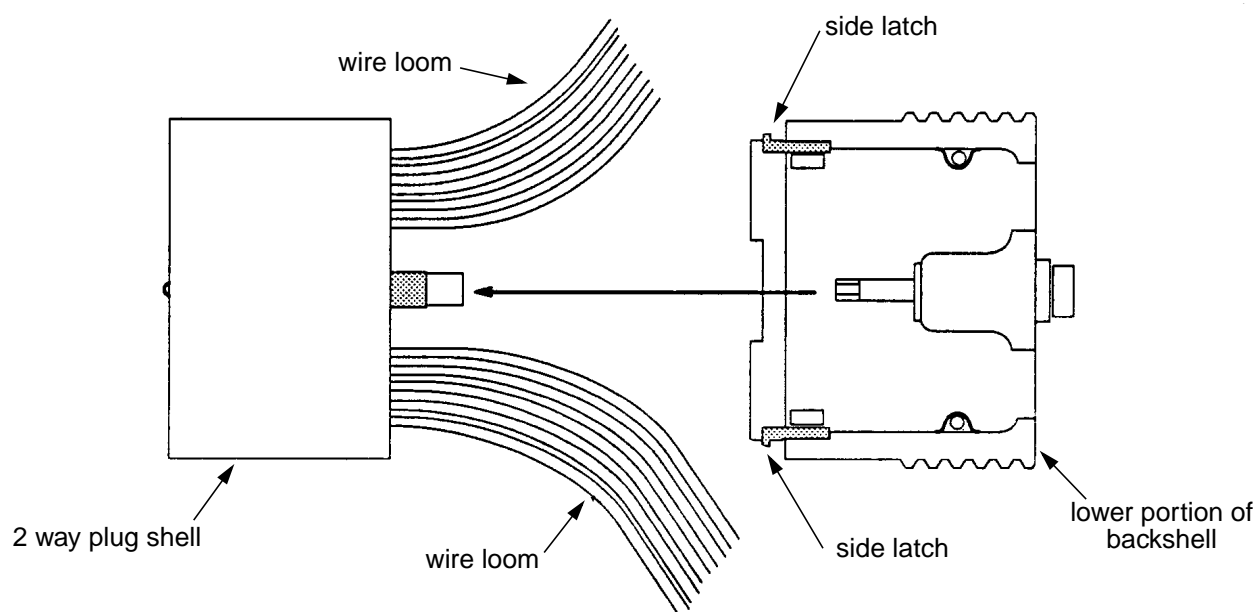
Connector Plug Extraction Tool (ref. [para. 4.2.6](#))
